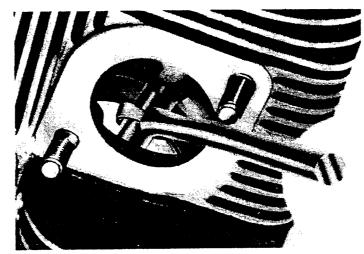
View Through Exhaust Port Showing Mechanical Fingers Holding Valve Stem
